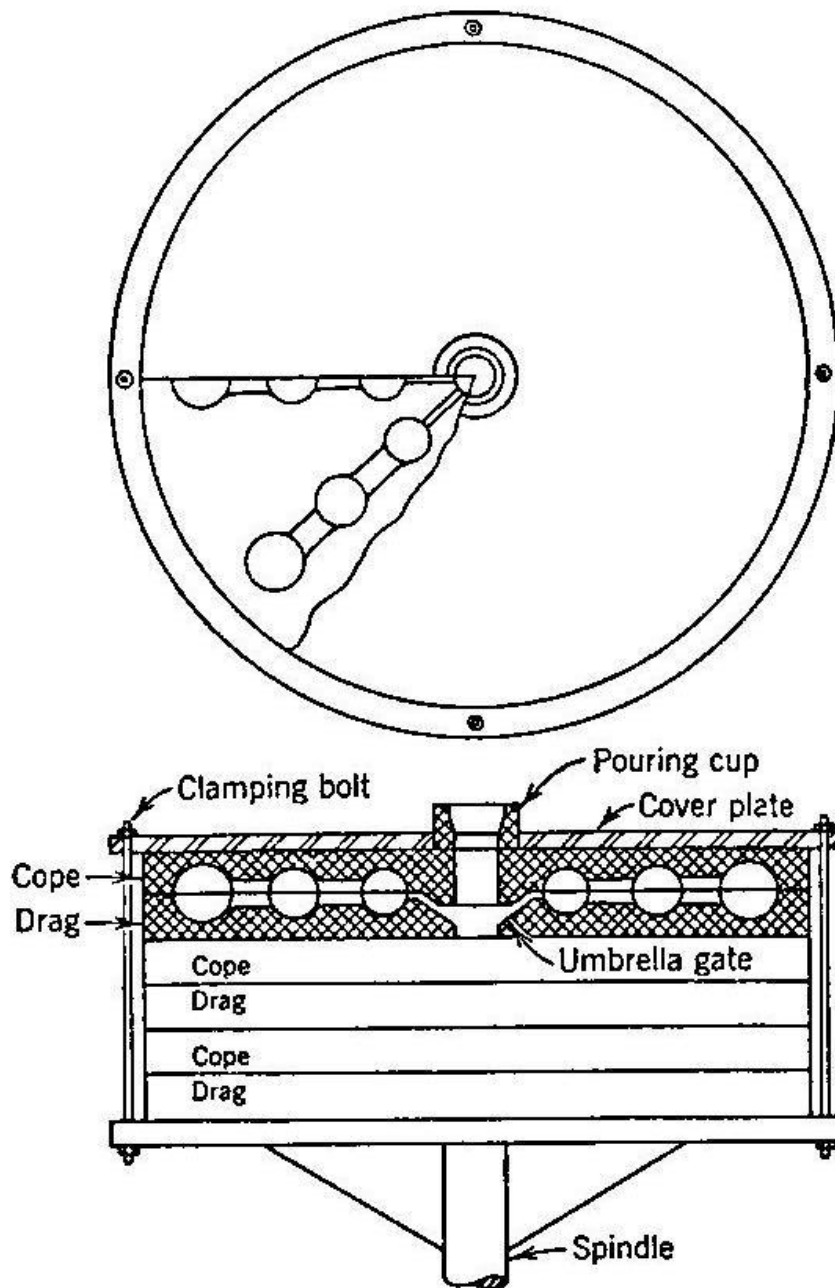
Centrifuging process showing a dry sand stack of three molds
